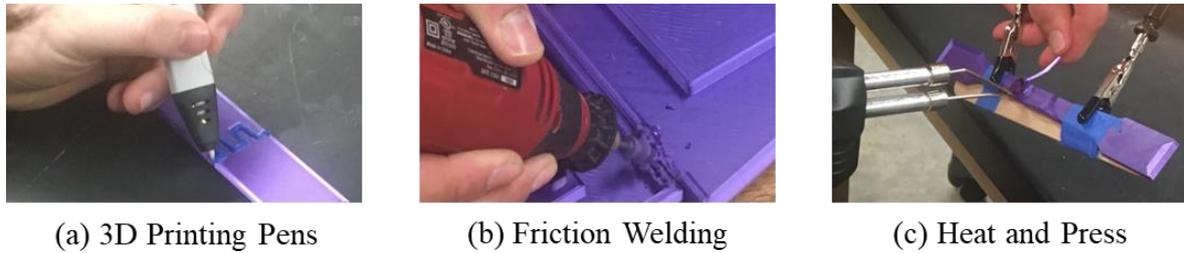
(a) 3D printing extrusion pens, (b) Friction welding with a rotary tool, (c) soldering iron
